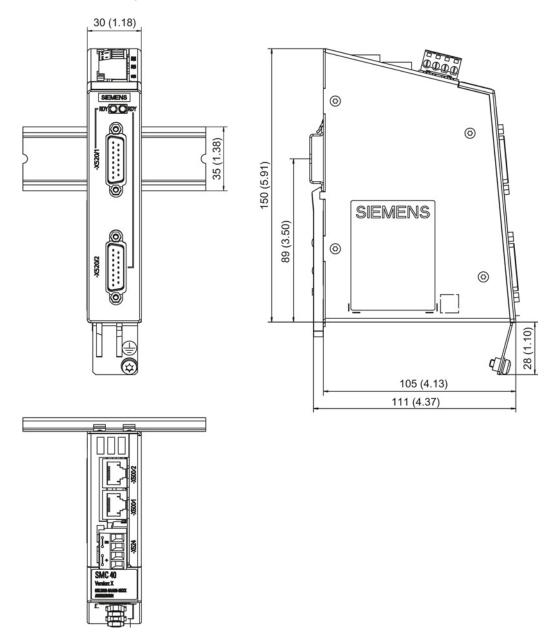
Dimension drawing of the Sensor Module Cabinet SMC40, all data in mm and (inches)
